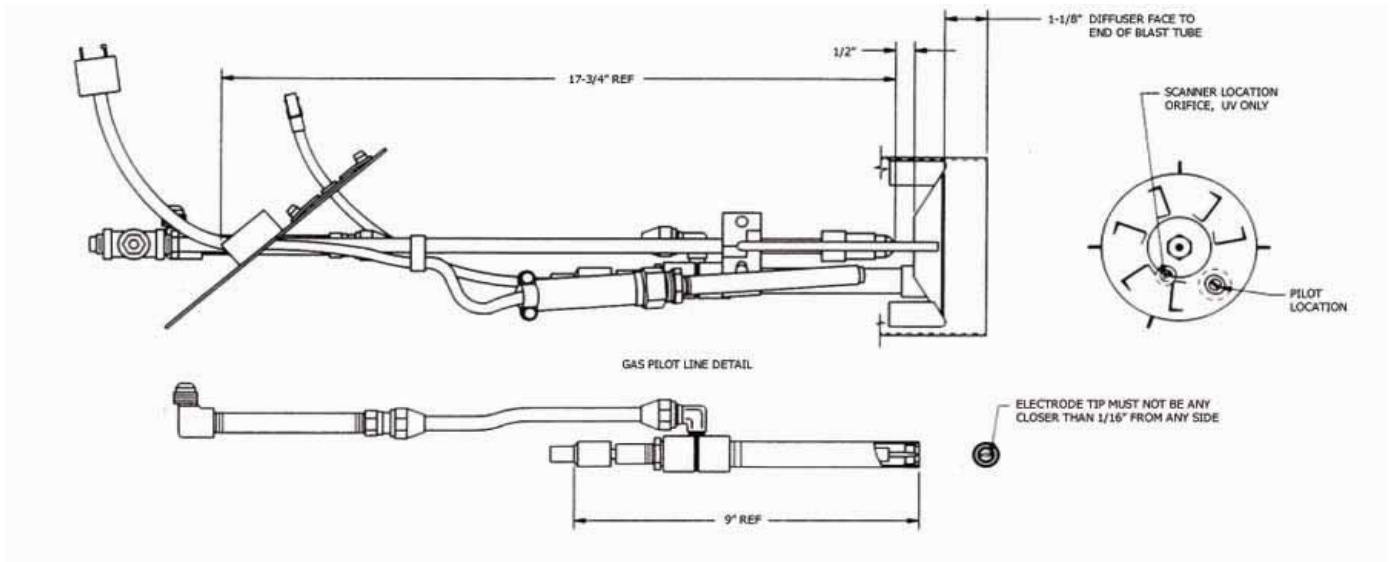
FPL, FPLG 8, 9, 11, & 12 Drawer Assembly with Gas Pilot
